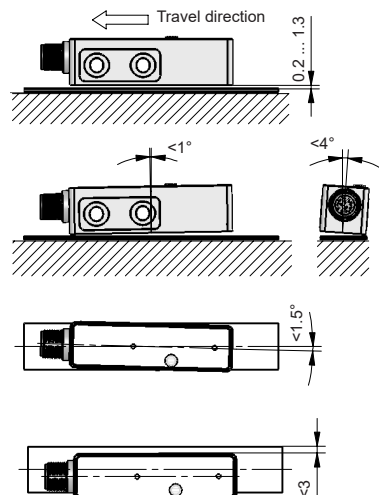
Mounting tolerances, dimensions in mm
